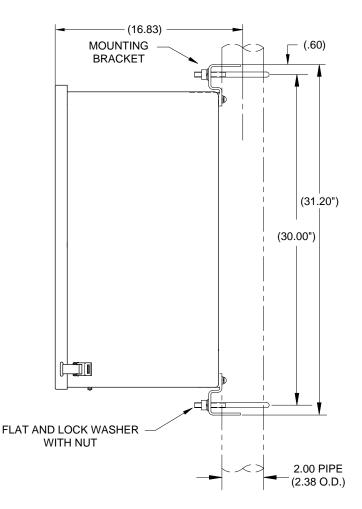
6800 Enclosure Pipe Mounting Installation
